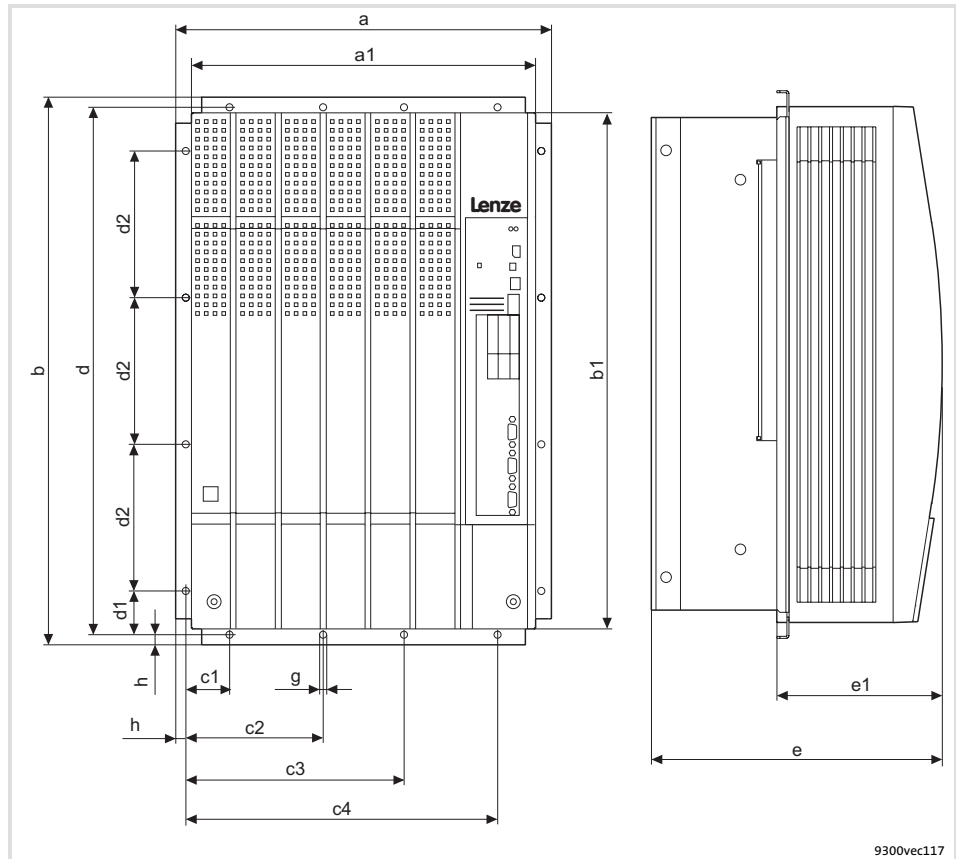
Dimensions for thermally separated mounting 45 kW
